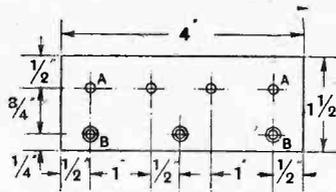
The terminal strip. A = 3/16 in.; B = 1/8 in. and countersunk.
